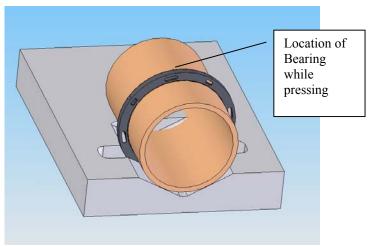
Release Ring shown over Cylinder in Bearing Installation Set-Up
